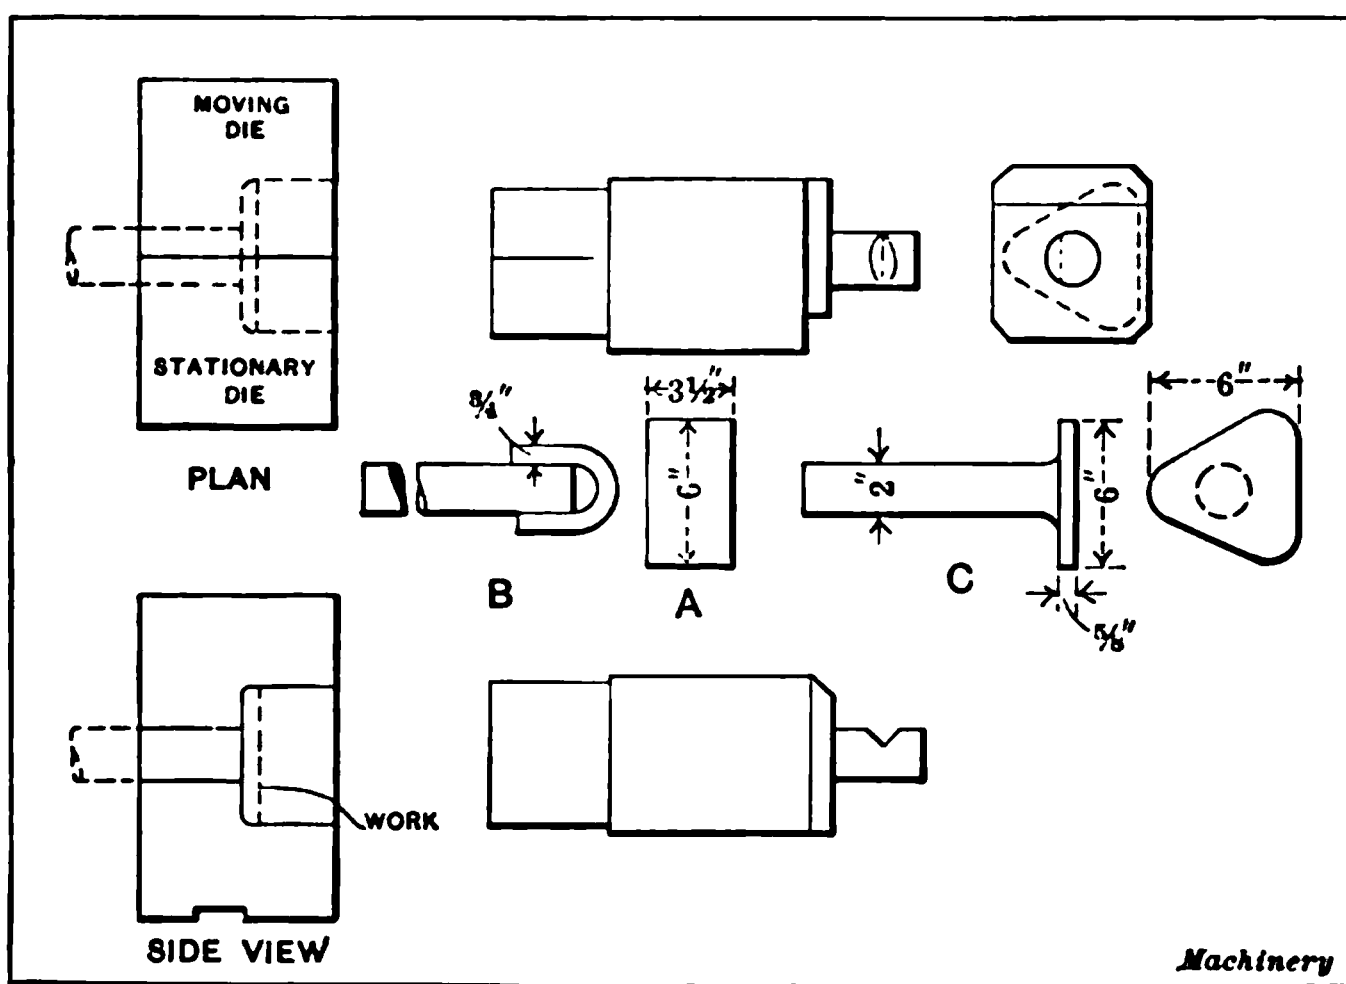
Forging Machine Dies and Tools for making a Car Float Stanchion Foot
